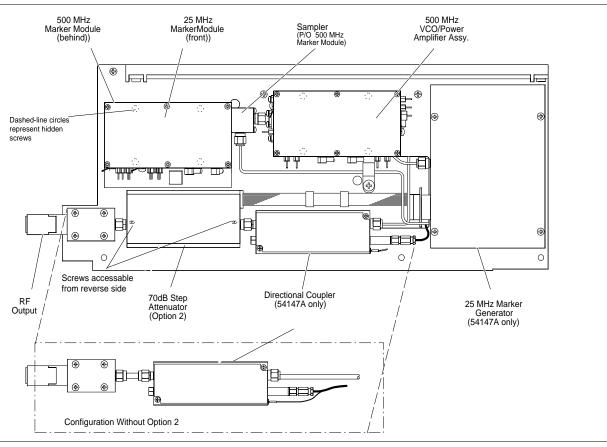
Models 54137A and 54147A RF Deck Parts Location (External Side Detail)
